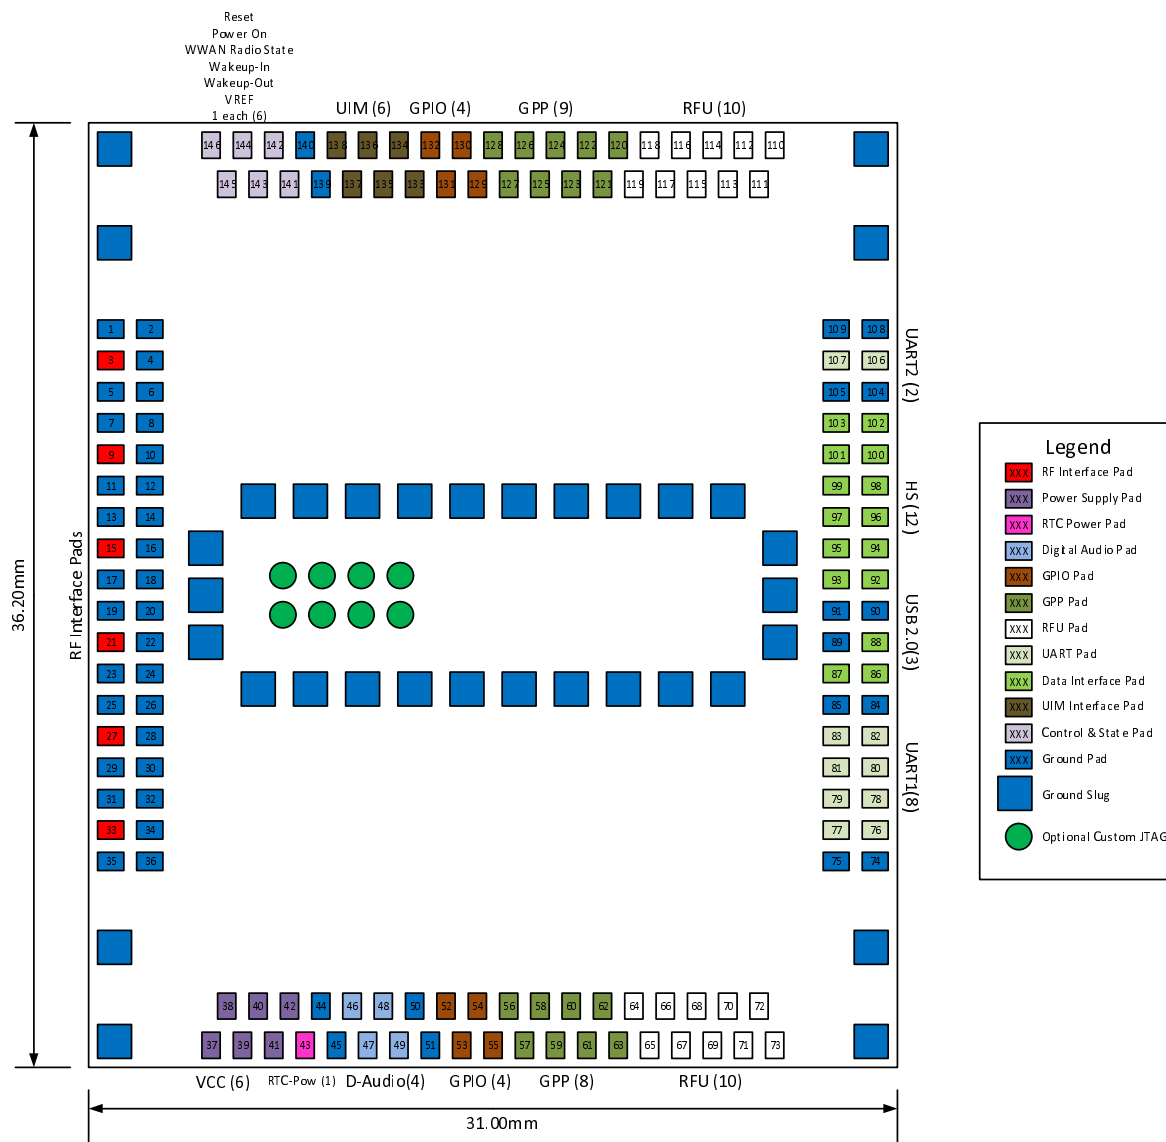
SMT3136 typical physical implementation (1 122 mm<sup>2</sup>), dimensions, pad numbering and placement
